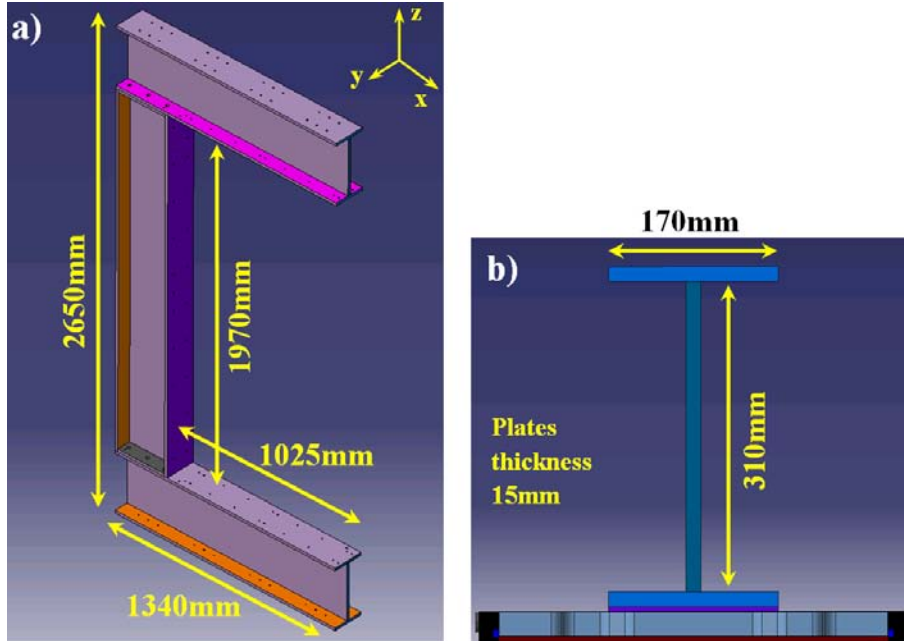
a) C-Frame external dimensions; b) C-Frame cross-section
